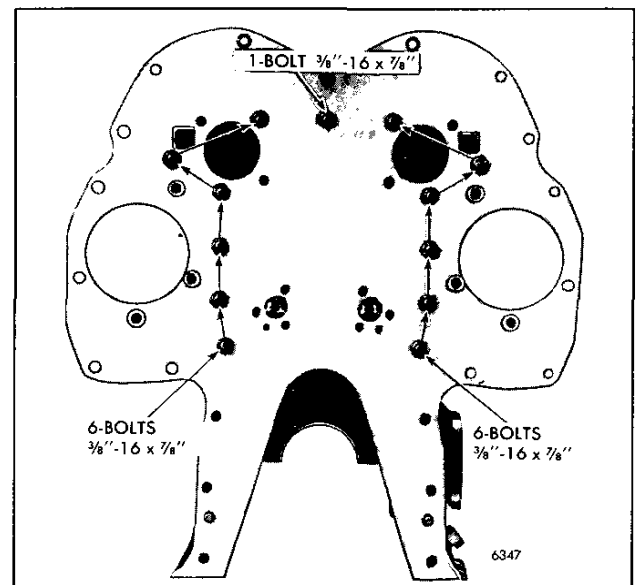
Cylinder Block Rear End Plate Mounting (4-53 Engine)
